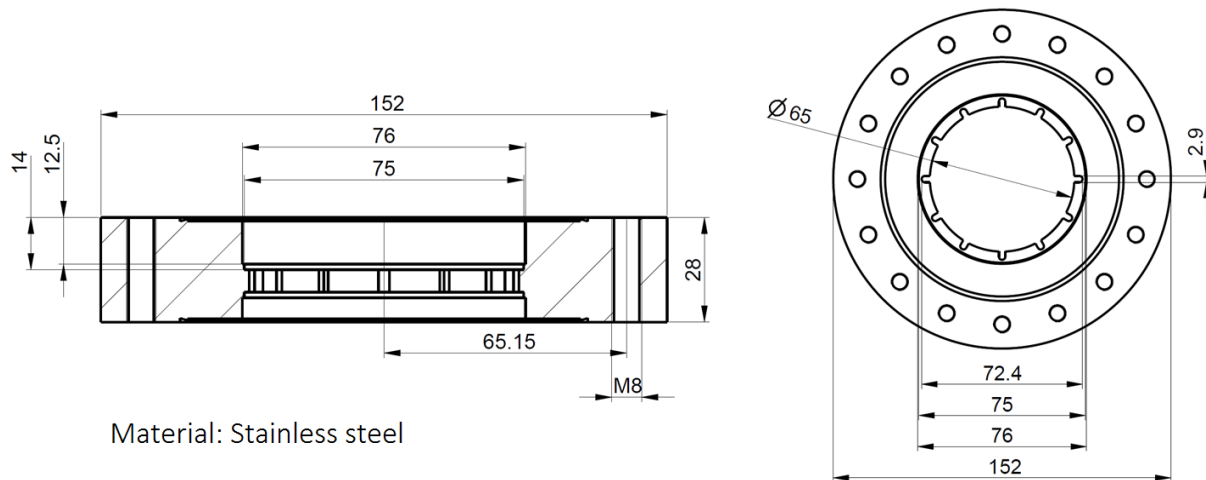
Technical drawing of the bottom flange – cross section and top view.
